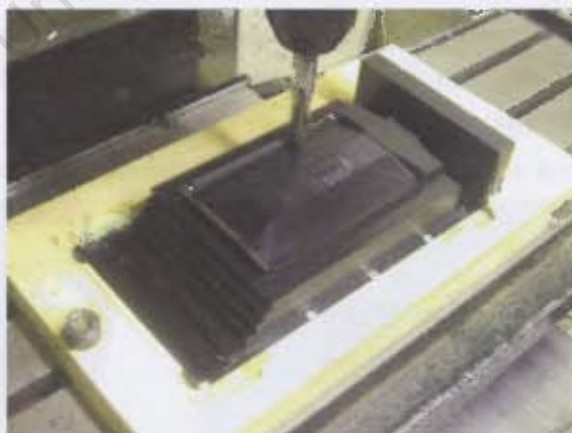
BOTTOM-COVER MACHINING (II)
